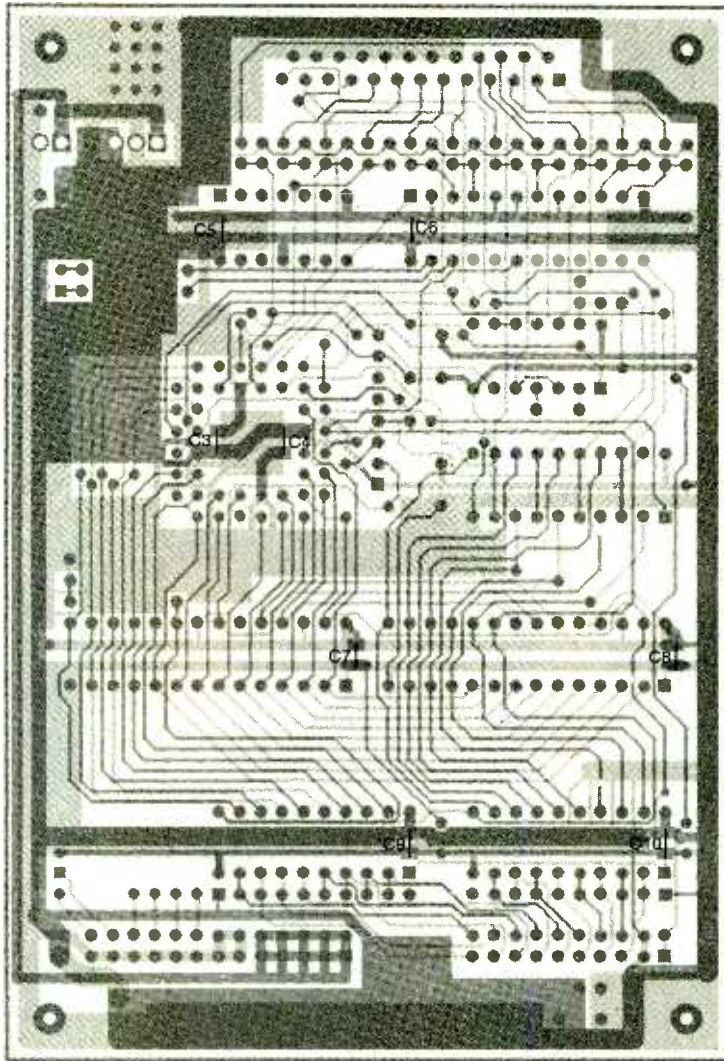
The solder side of the logic analyzer board has a handful of surface-mount capacitors attached to it. Those components should be mounted before the through-hole components.
